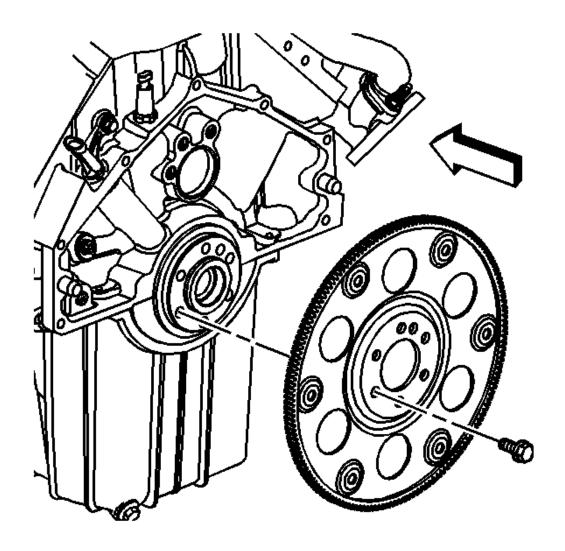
View Of Engine Flywheel & Bolts Courtesy of GENERAL MOTORS CORP.
